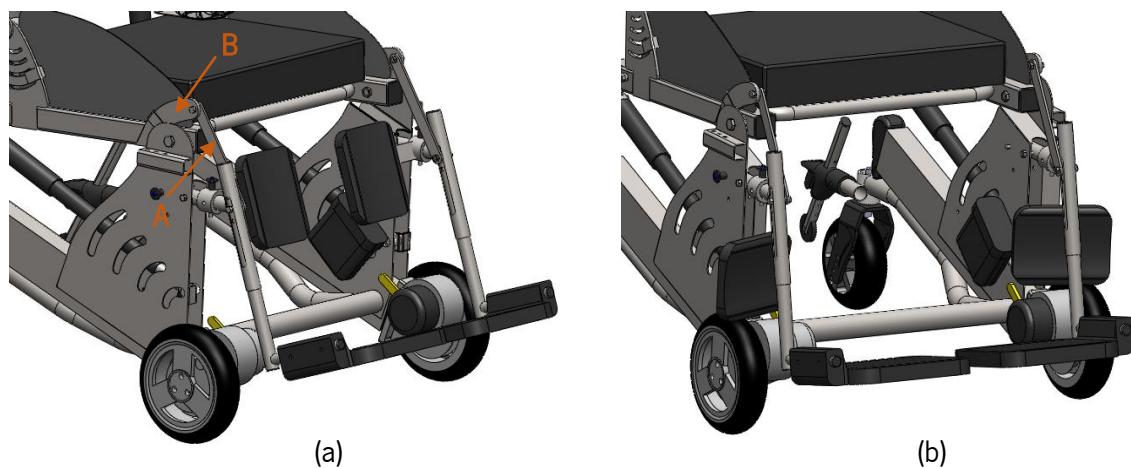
Footrest mechanism: (a) standard configuration, (b) calf support rotated.
